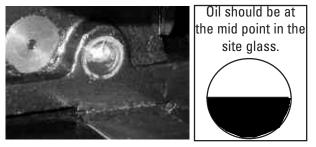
The oil level should be half way in the oil site glass located under the lathe spindle.
